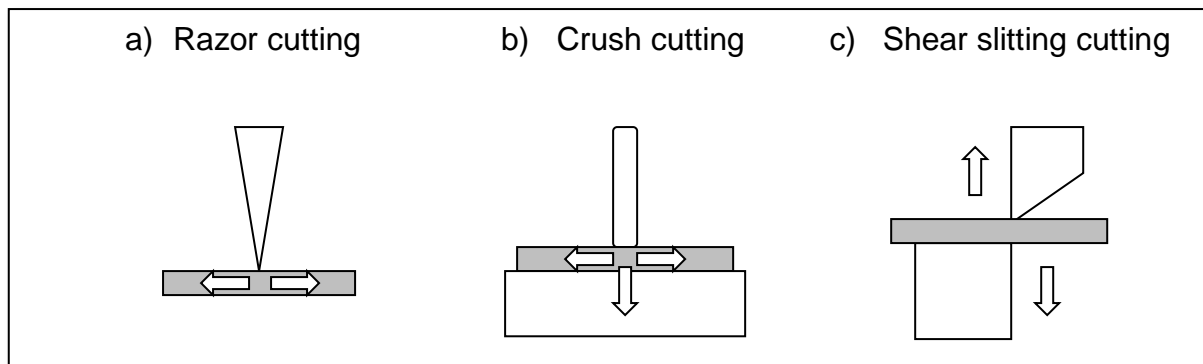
Representation of the main cutting mechanisms: razor, crush and shear cutting
